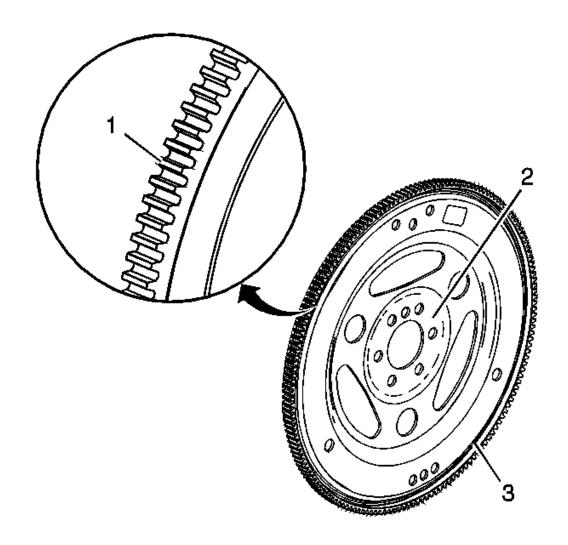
View Of Ring Gear Teeth Courtesy of GENERAL MOTORS CORP.
